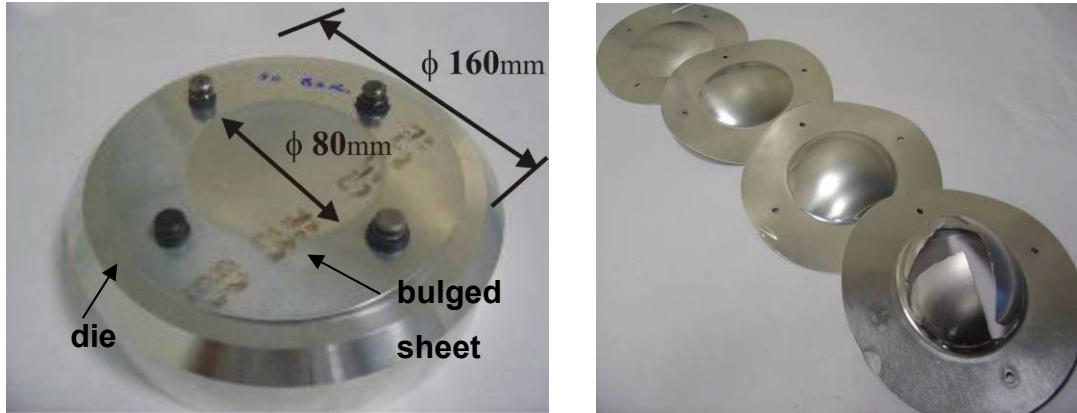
Circular Bulging Specimen: (a) The die and the bulged sheet
